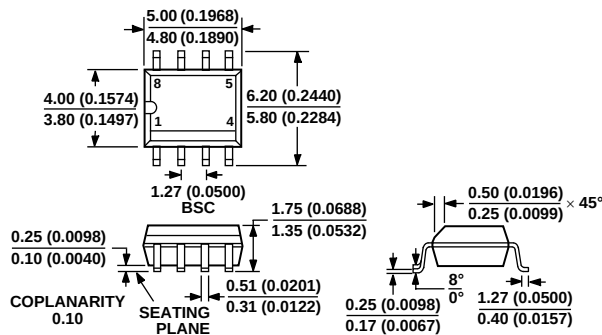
8-Lead Small Outline Package [SOIC_N]
